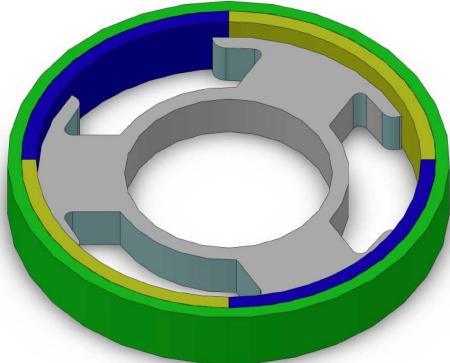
A spindle motor with 3 slots and 3 magnetic pole-pairs (Motor-B)
